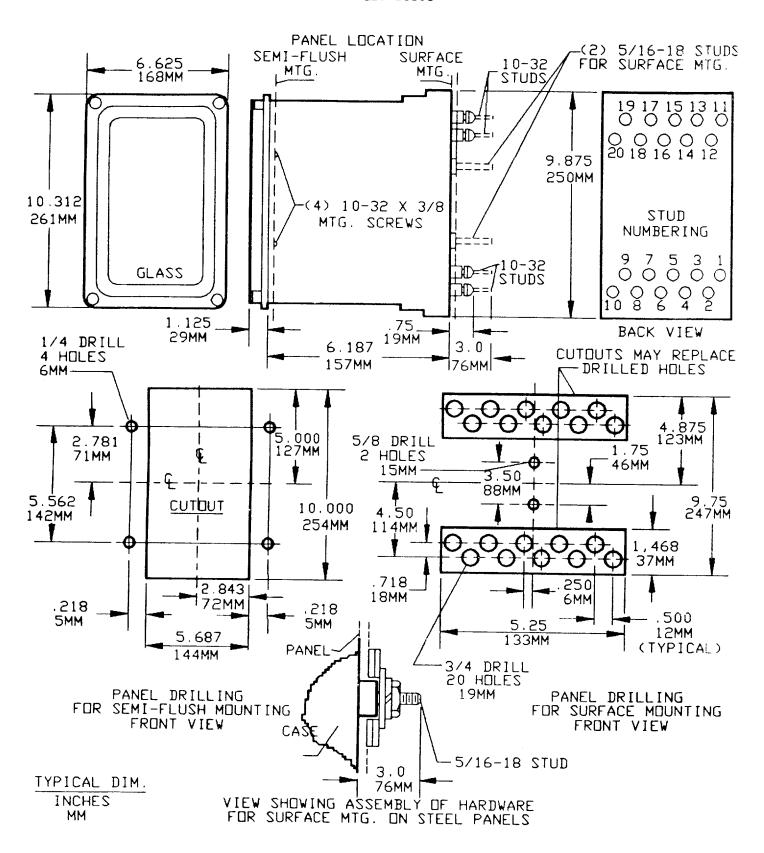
(K-6209272[7]) Outline and Panel Drilling Dimensions for Size S2 Case
